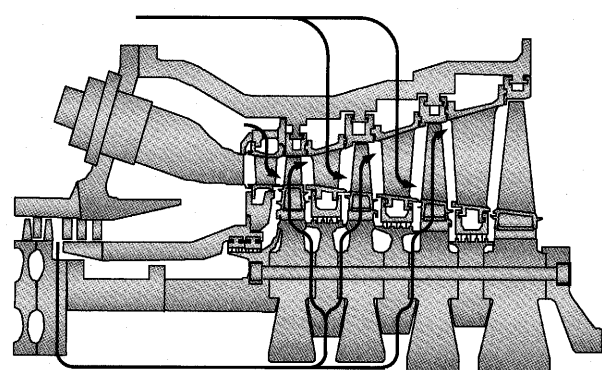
(b) shows the hybrid cooling system. The turbine rotor blades are cooled by compressed air extracted from the compressor the same as in Fig. 3 (a). However, the turbine nozzle blades are cooled by high humidity air which is humidified in the saturator. This system can be realizable by remodeling the coolant piping for the nozzle blades.
